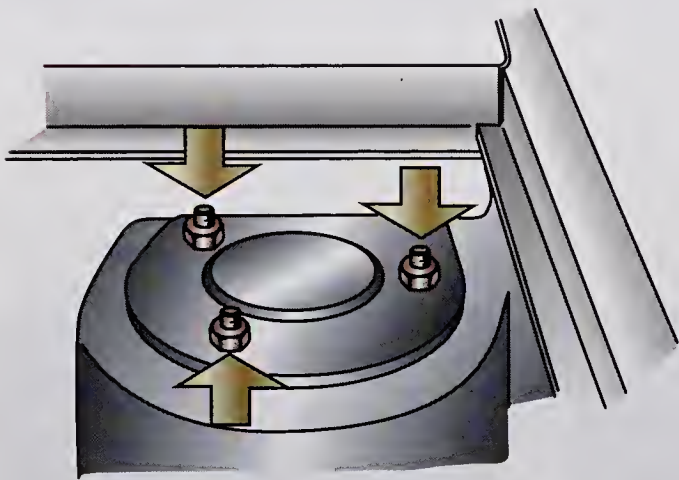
Nuts installed on upper strut mount bolts.
